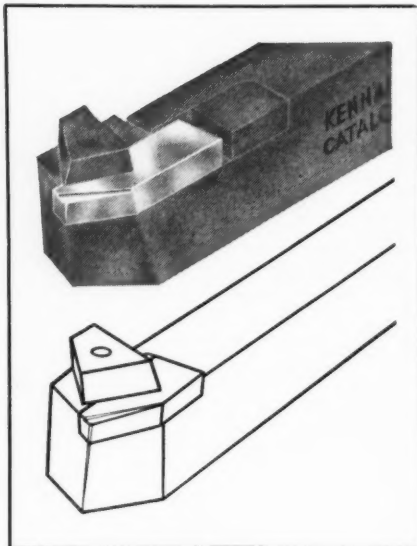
McKenna Clamped-on Type Carbide-tipped Tool
